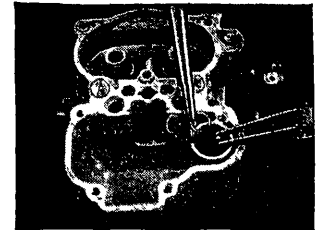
Install intake check ball, pump check ball retaining ring and pump strainer
